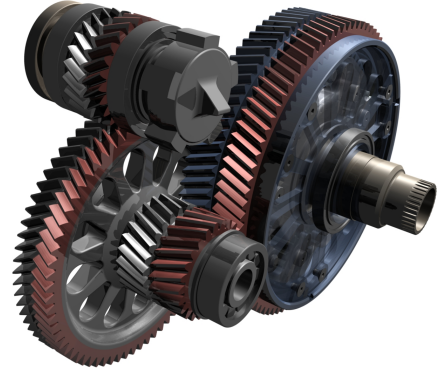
Axle drive of transmission CS03 (drive motor not illustrated)
